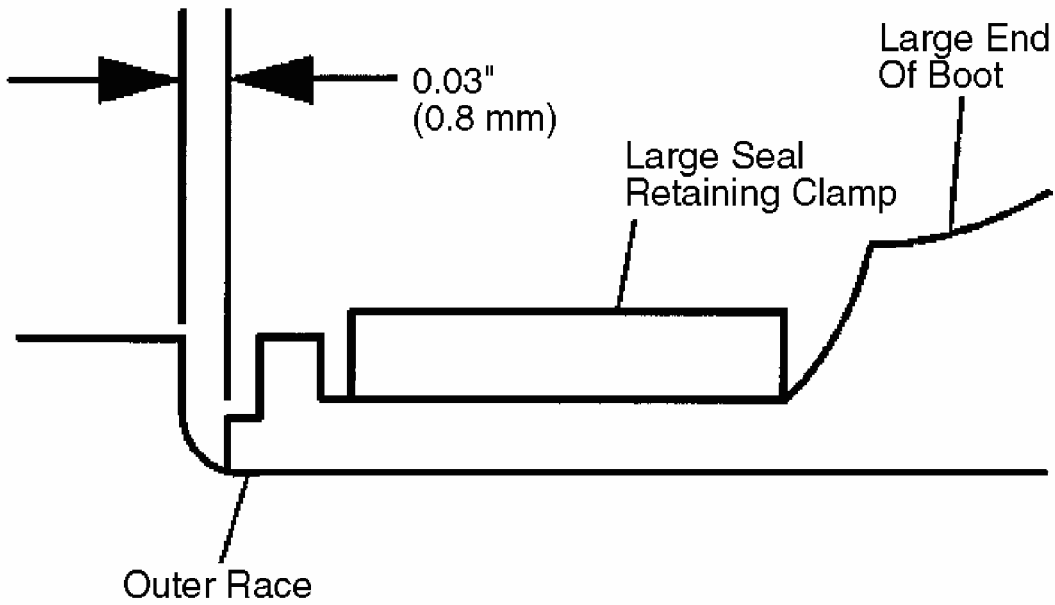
Identifying Proper Gap Width Of Crimped Seal Clamp (Large Clamp Shown, Small Clamp Is Similar)
